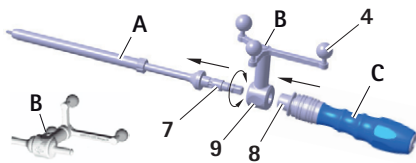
Mounting the reference star unit ("pre-calibrated") and S⁴C handle onto the S⁴C taper
